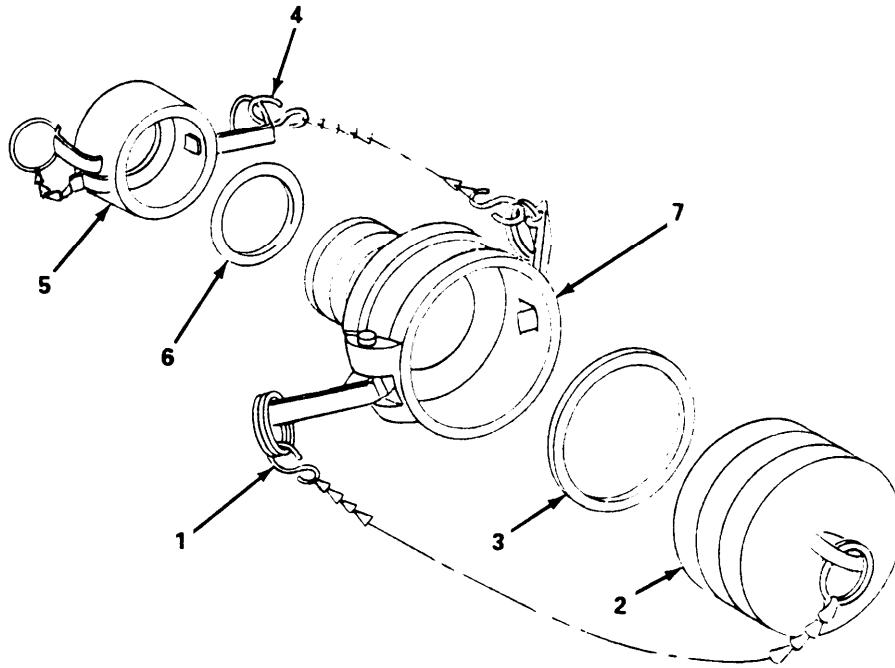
Adapter Assembly, Disassembly/Assembly.
